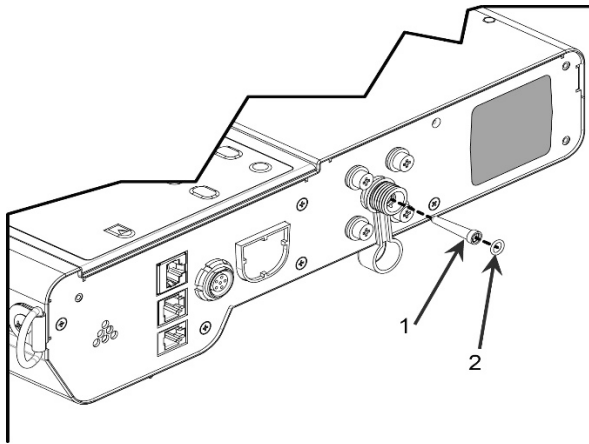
Removing the Rubber O-Ring from inside the O₂ Inlet Port
